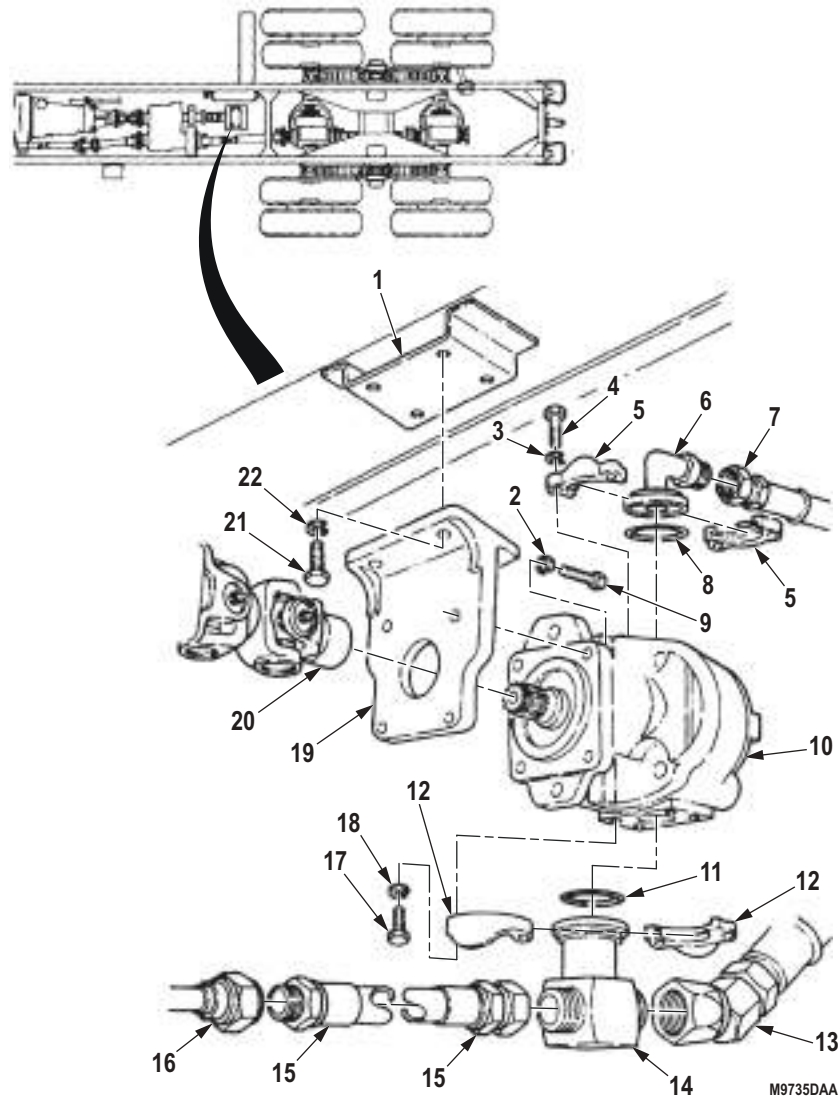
Wrecker Crane Hydraulic Pump Removal.
